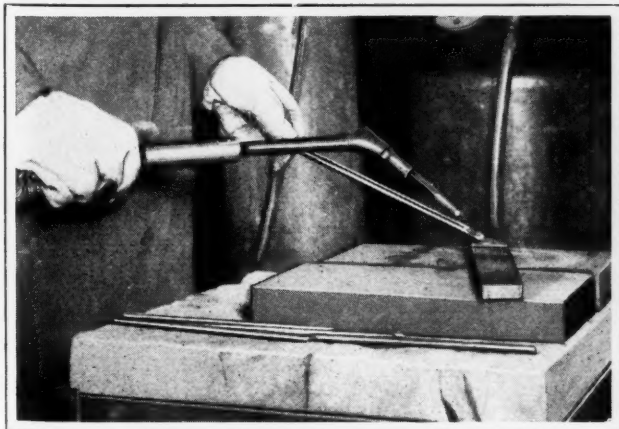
Correct Method of holding the Blow-pipe and Stellite Rod in stelliting Flat Surfaces
